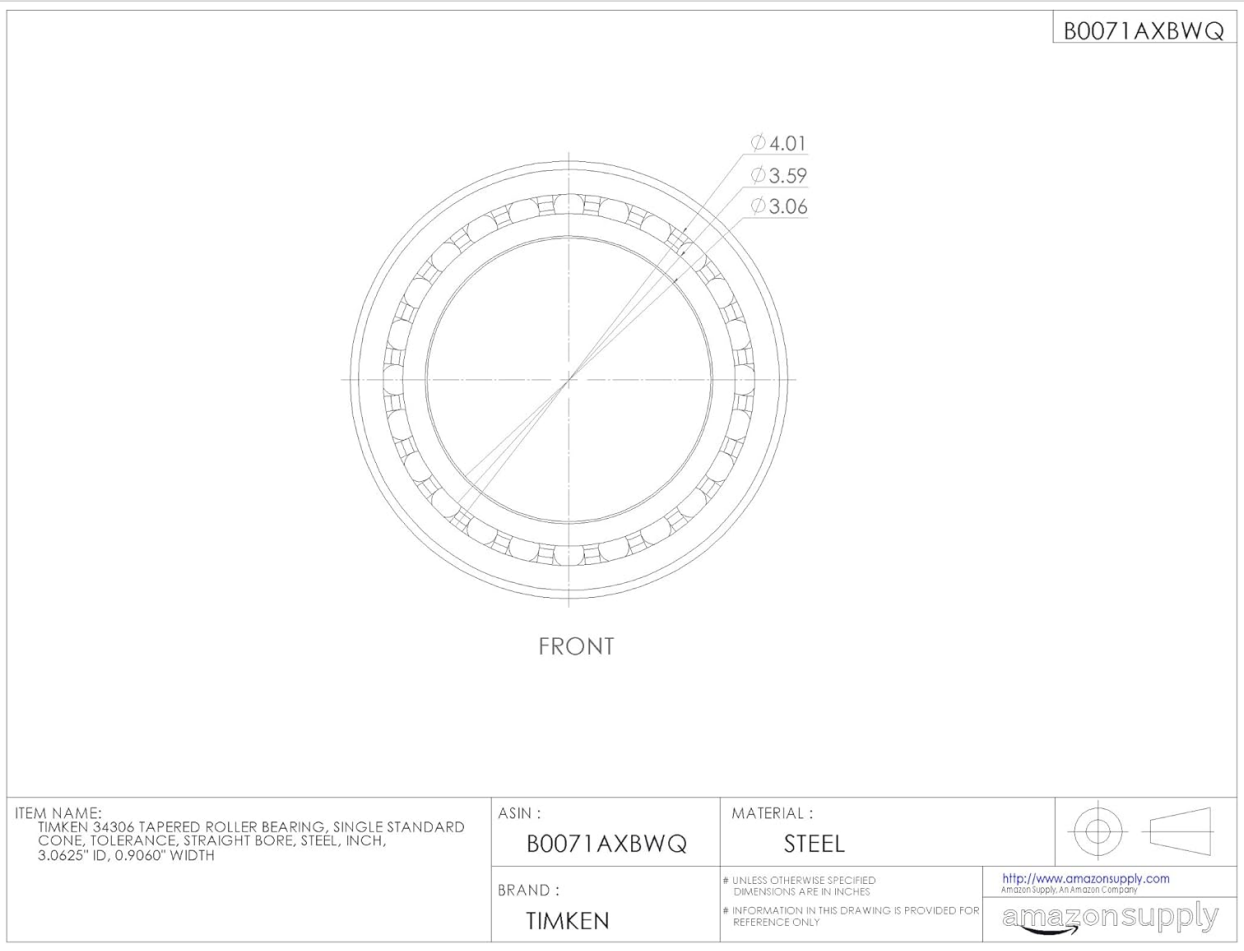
Front view technical drawing of the Timken 34306 Tapered Roller Bearing, showing key dimensions.
